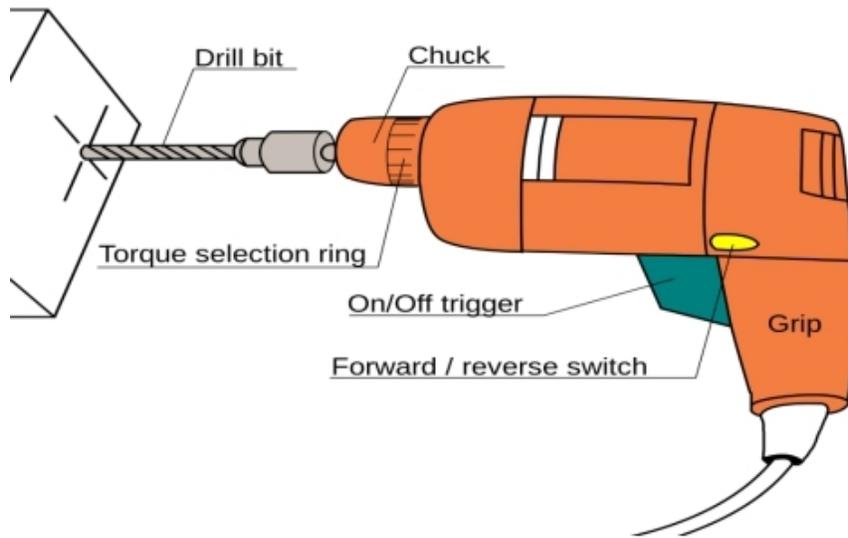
The Drilling Machine (mechanicalnotes.com, 2021)
